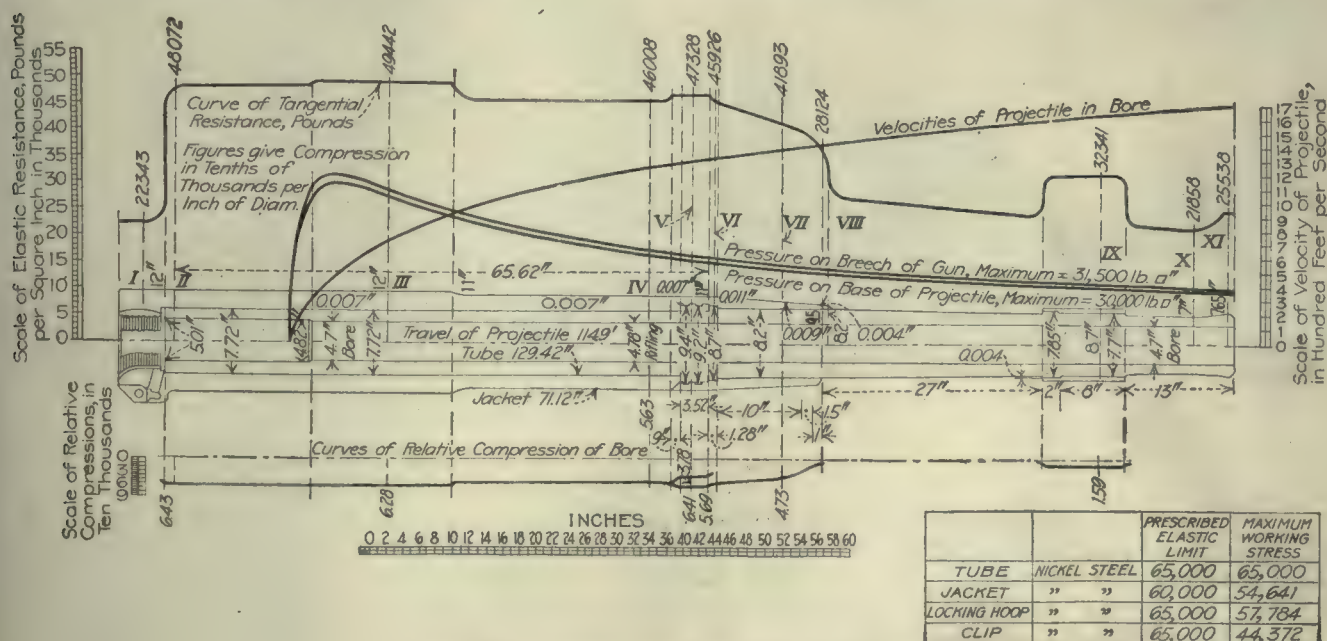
SHRINKAGE PLAN OF 4.7-IN. GUN
